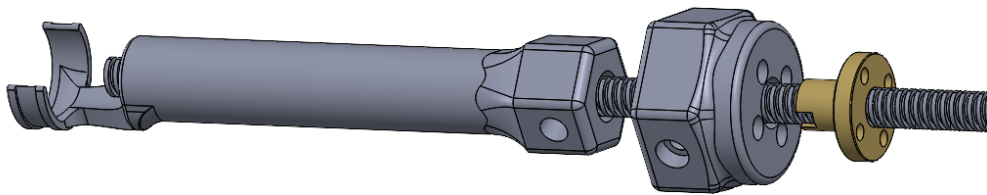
Exploded View: Disassemblable actuation pen and nut with lead screw.
